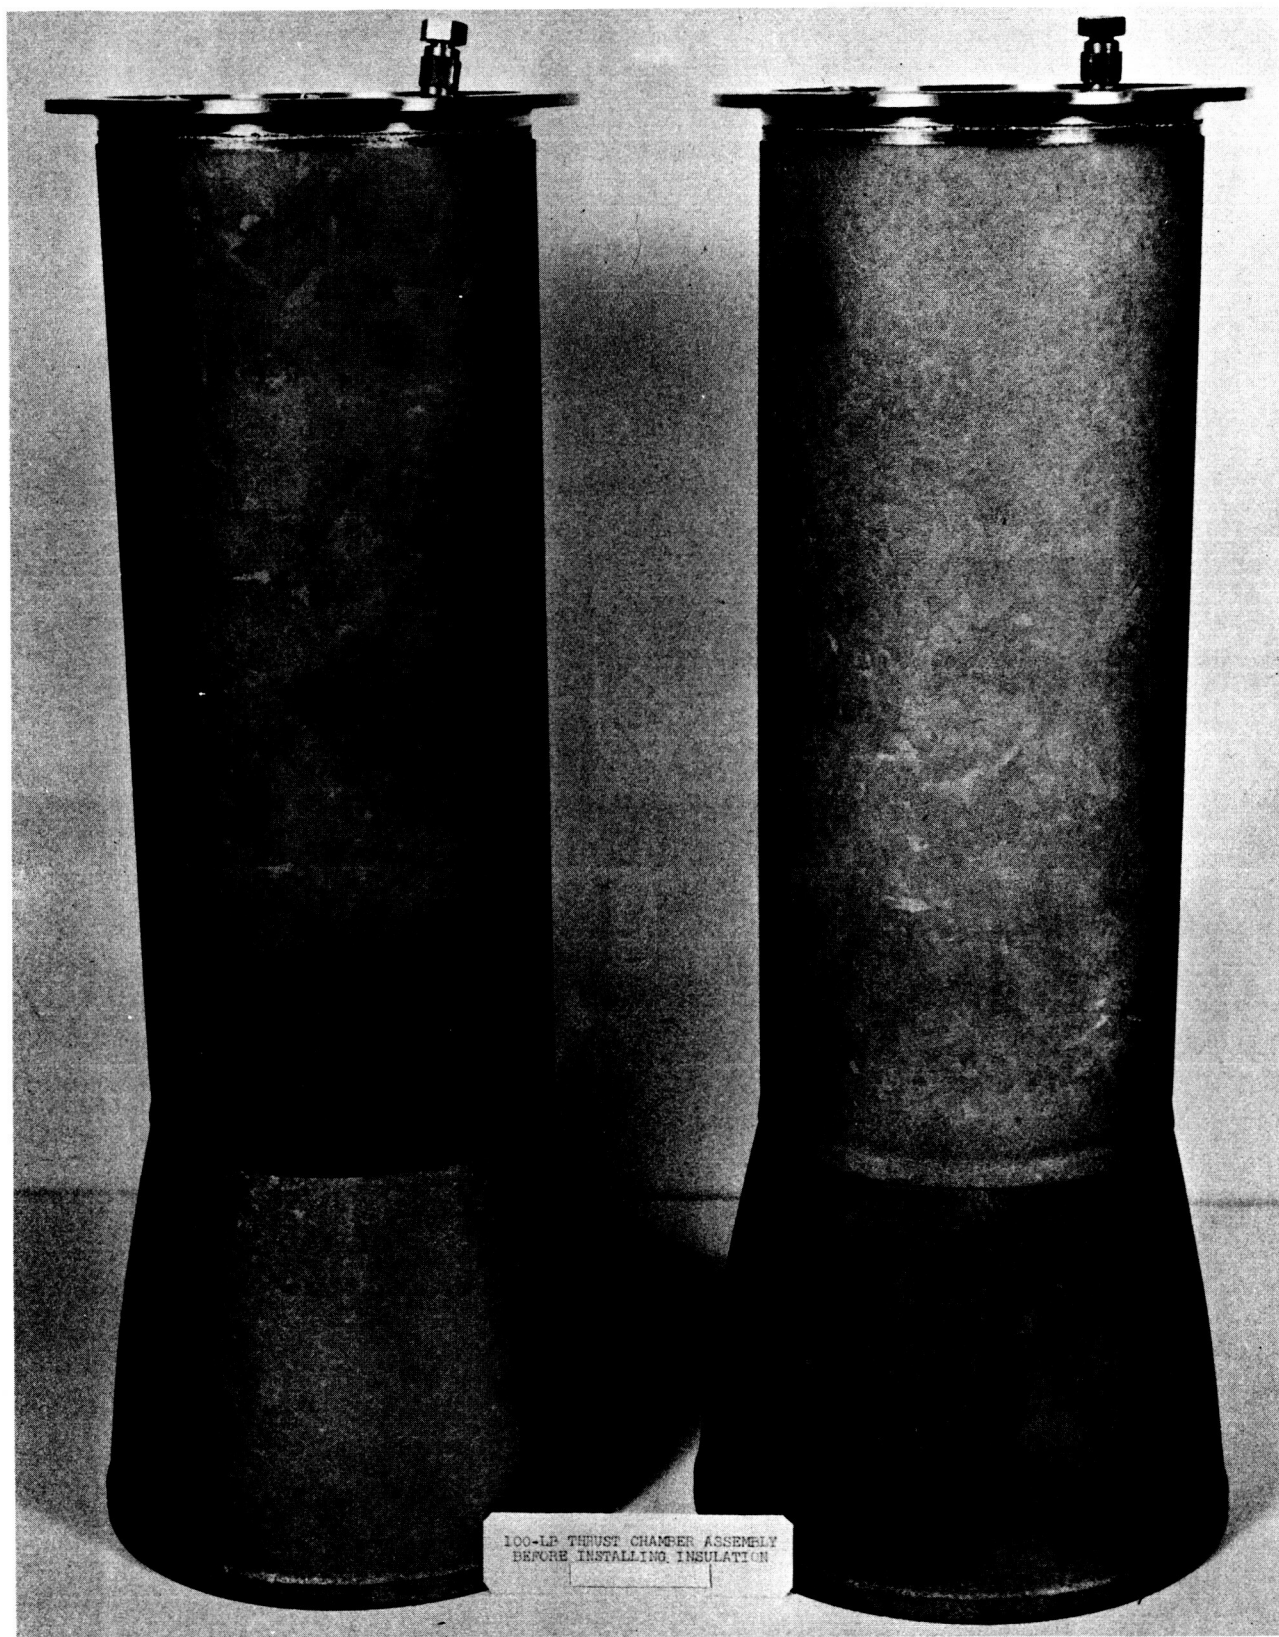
100-lb Thrust Chamber Assembly Before Installing Insulation
